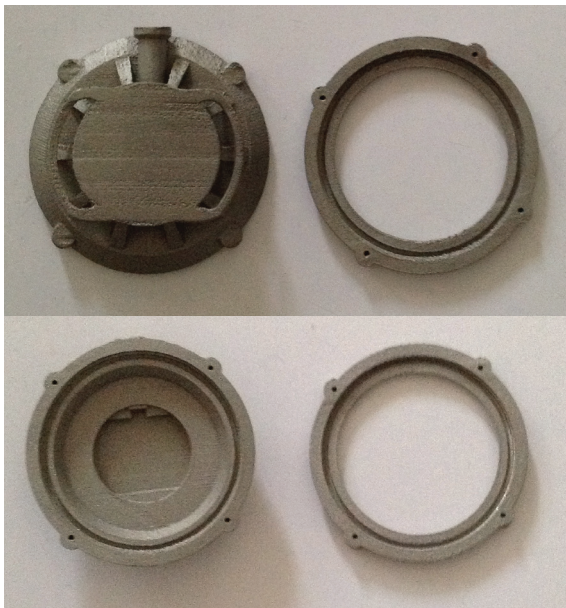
3D printed titanium parts (top and bottom housing / upside and down views). This EBM printing method did not produce the desired parts with the right accuracy.
